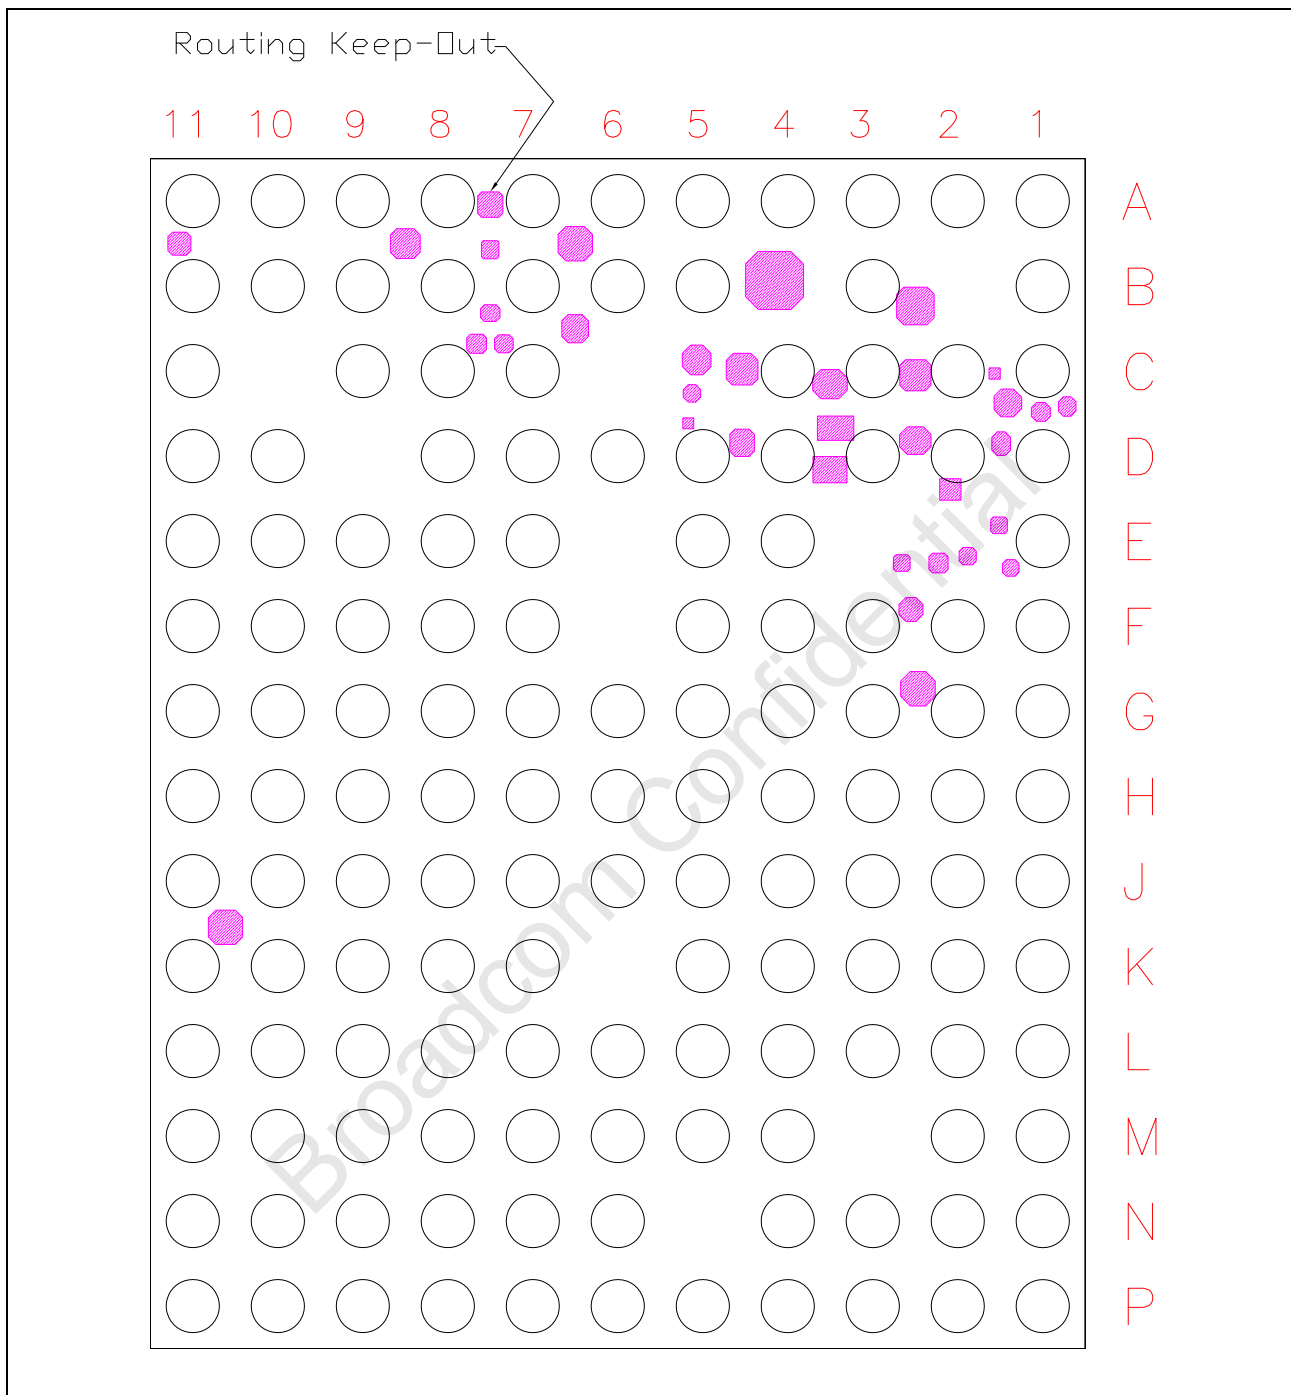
WLBGA Keep-Out Areas for PCB Layout—Bottom View
